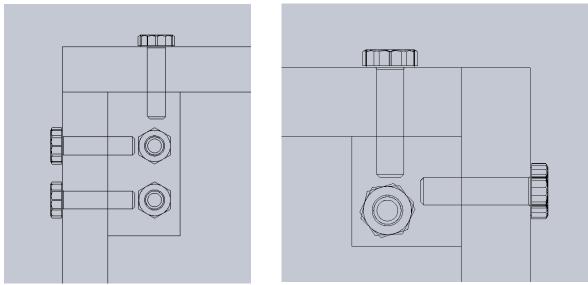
Bolt Clearances: Figure on right is a top view of the housing showing the clearance of the bolts once joined. Only one bolt is needed to fasten the top and bottom plates since they are not load bearing and are simply there to retain the oil.
